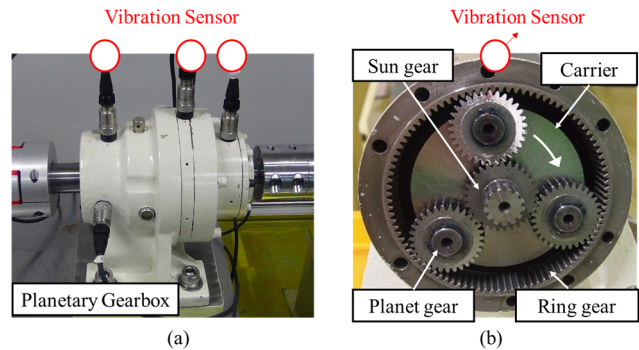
Planetary gearbox; (a): outside of the gearbox, (b): Inner side of the gearbox
